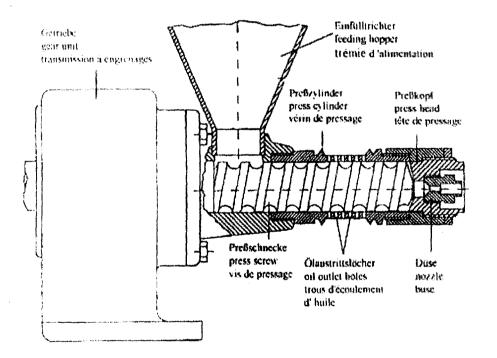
Sectional view of an oil expeller (German, English and French Labeling)
